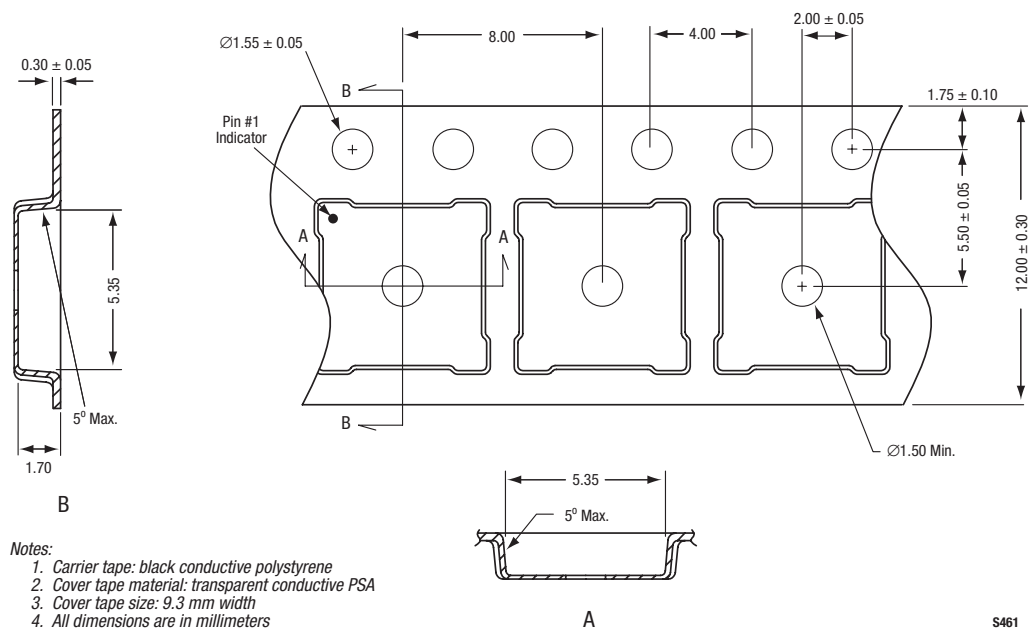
SKY73009 32-Pin RFLGA Tape and Reel Dimensions
